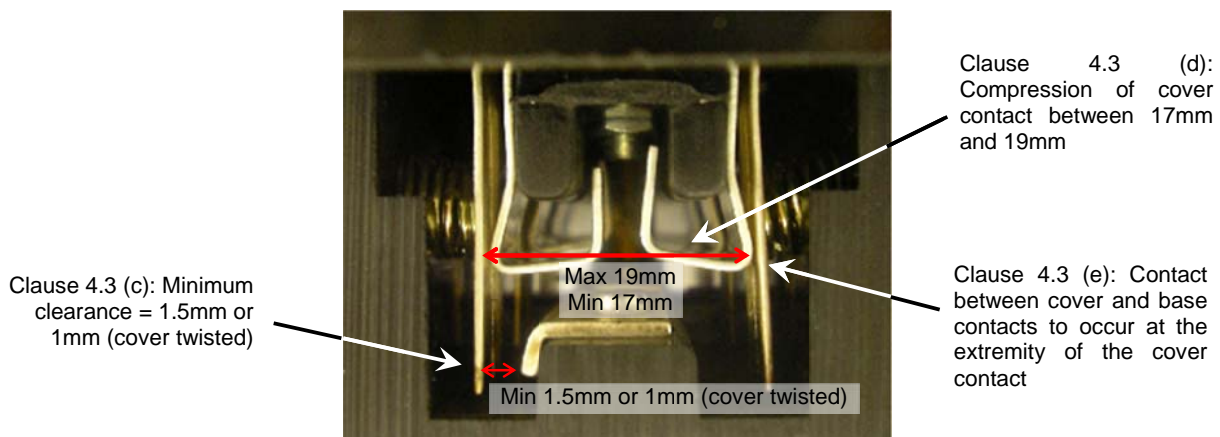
Internal view of PK2 test block illustrating internal clearances and contact points
